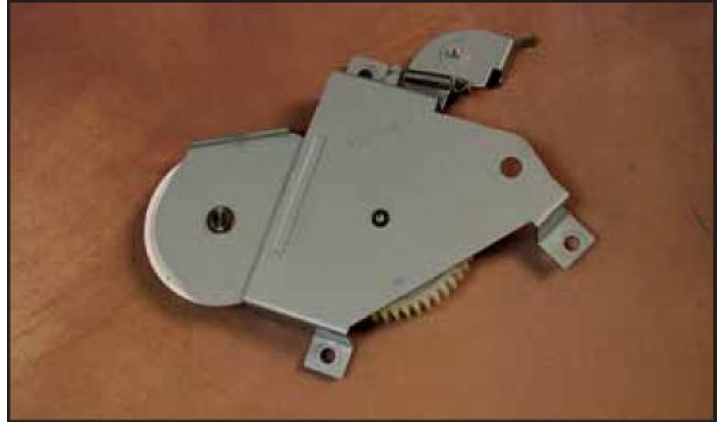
The swing plate assembly for the HP LaserJet 4200/4300 series (part # RM1-0043).
